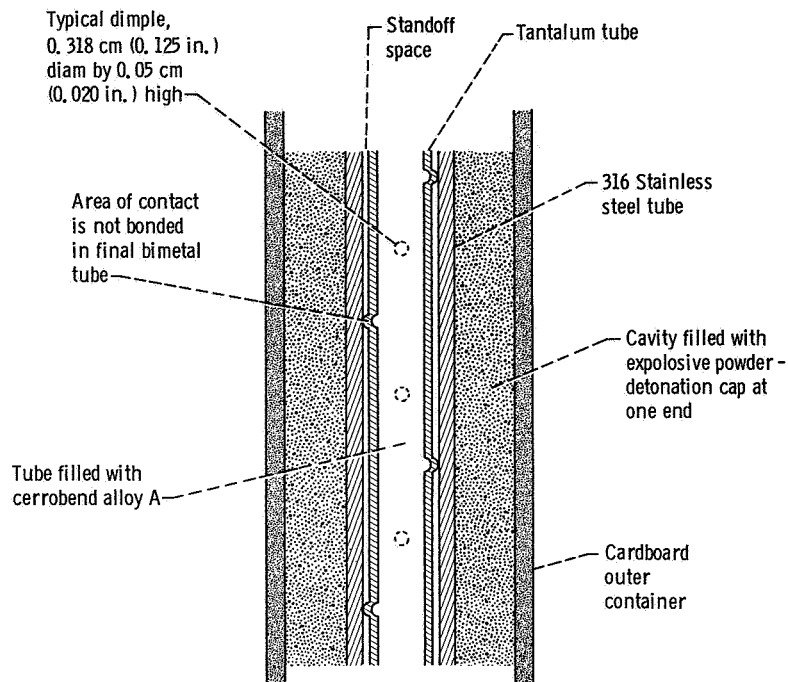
Configuration and setup for explosion welding of tantalum/316 stainless steel bimetallic tubing.
